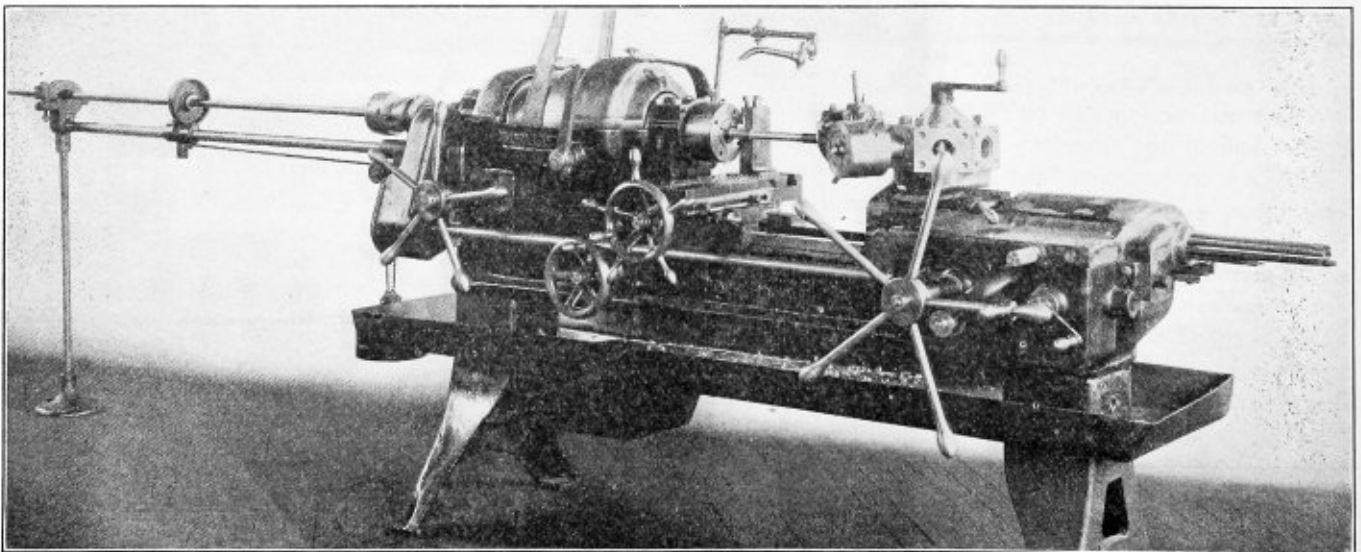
Lassiter-Millholland Model A Machine Equipped for Cutting Side Staybolts from Bar Stock
